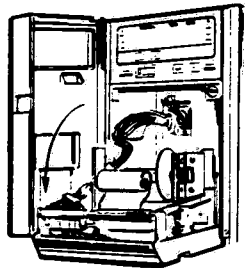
3-WAY SOLENOID VALVE GASKET RETAINER POSITION.
